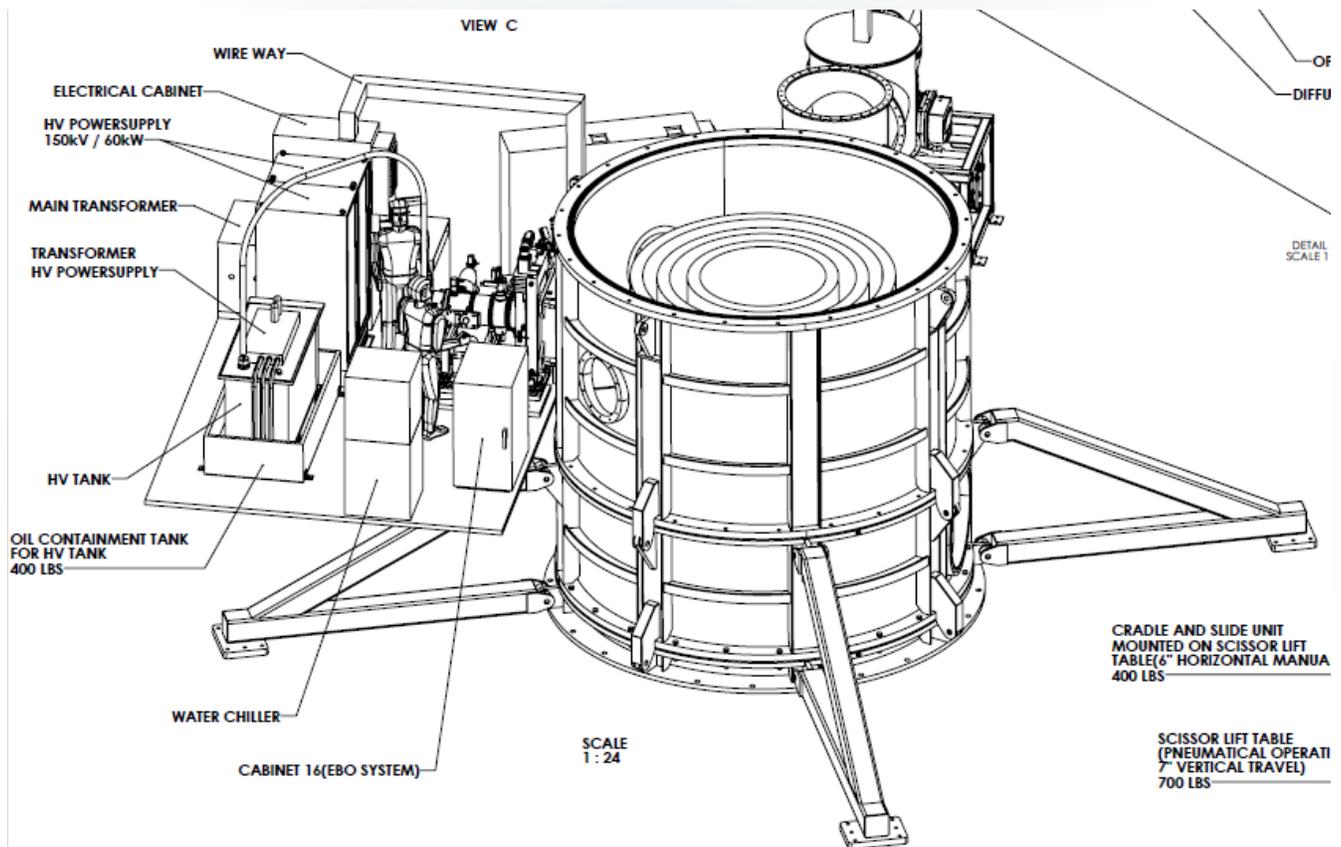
A conceptual drawing of the entire MIC-EBW system, including all modules, a platform for welding, and welding equipment.
